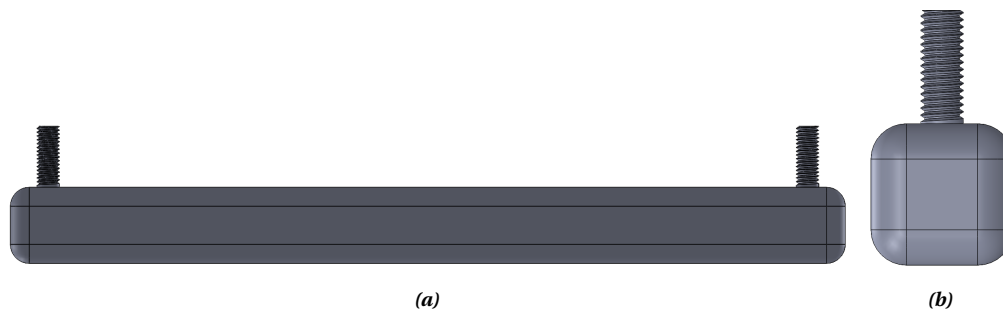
First Marker Instrument. a. Side view, b. Front view
